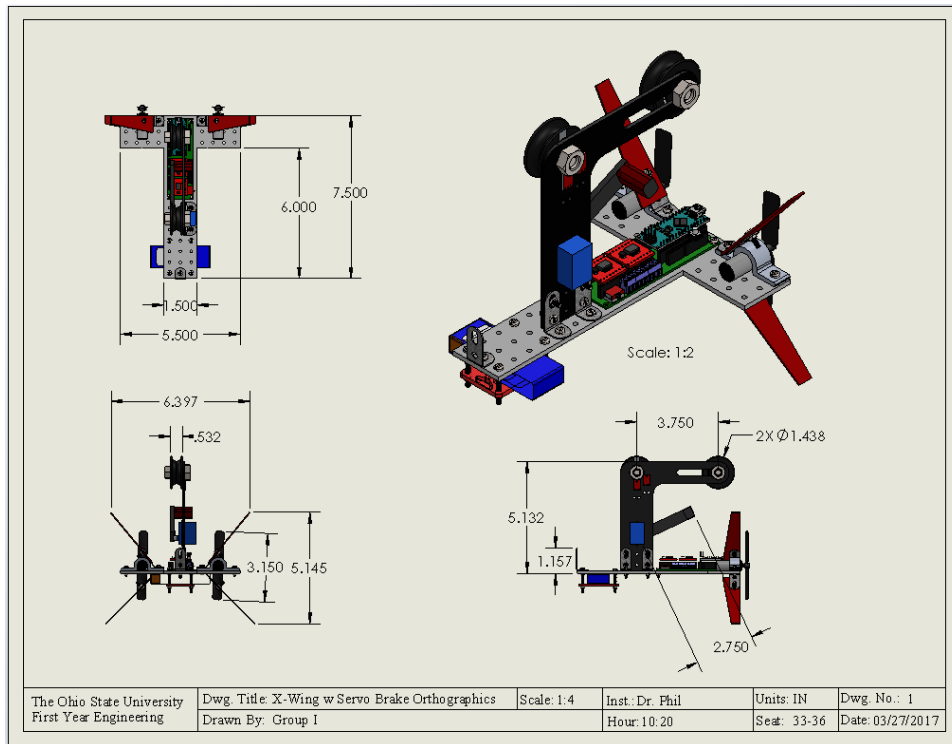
X-Wing w/ Servo Brake Orthographic Views w/ Dimensions (Final Design)
